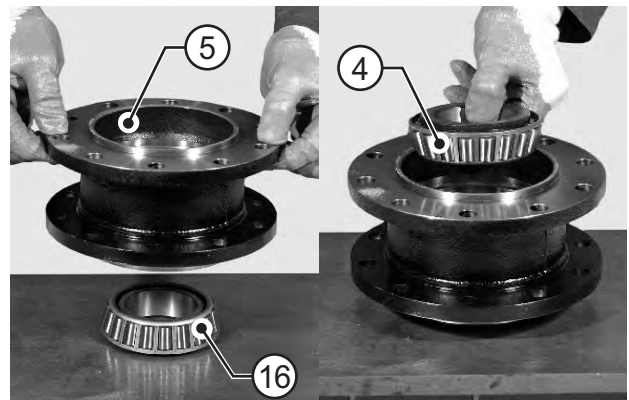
Using a surface plate, position the pinion support (5) on the outer bearing (16) and then insert the outer bearing (4) in the pinion support (5).
